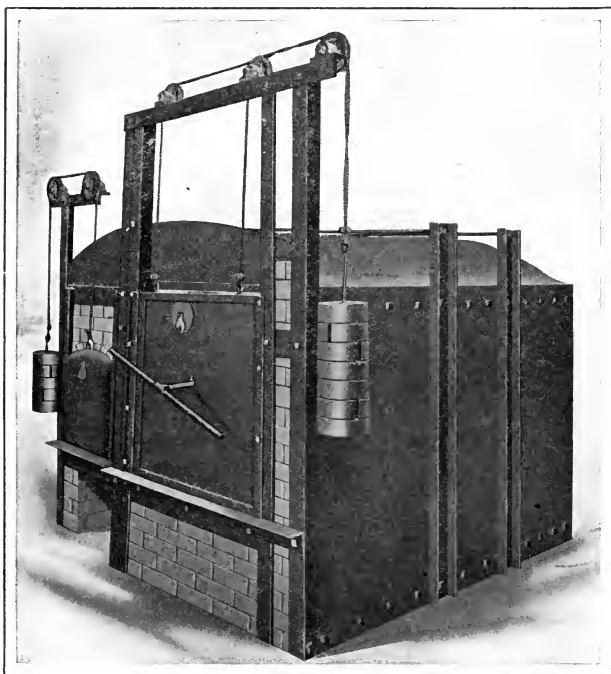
SINGLE-DRUM COKE BURNING FURNACE
